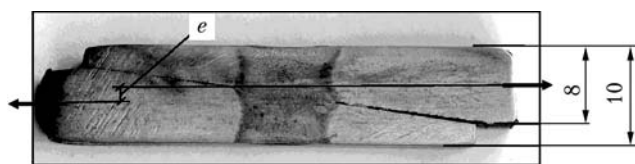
Macrosection (x1) of welded joint on 10kp (rimmer) steel parts with 8 + 8 mm thickness, having bevels on their mating surfaces
